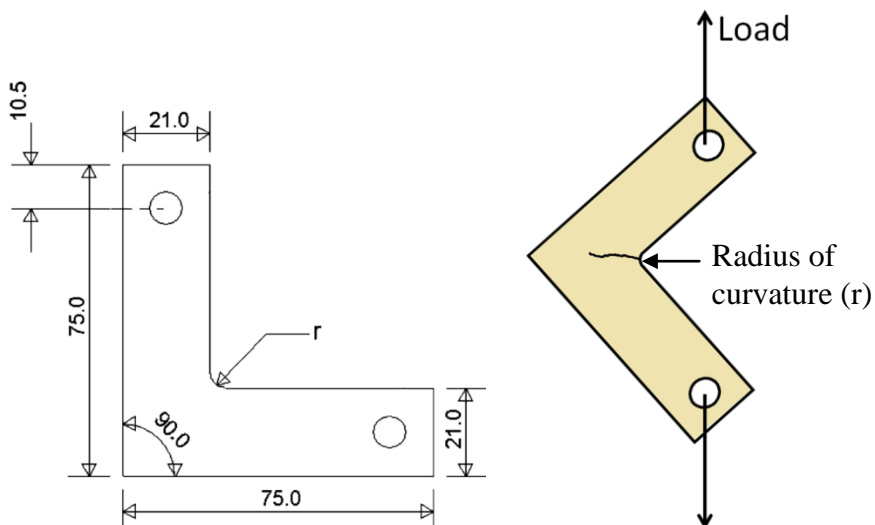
Dimensions of the L-shaped specimen (mm) (source: [9]) and a specimen under loading.
